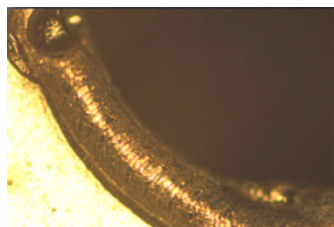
Bad welding seam with a hole and a gap.
